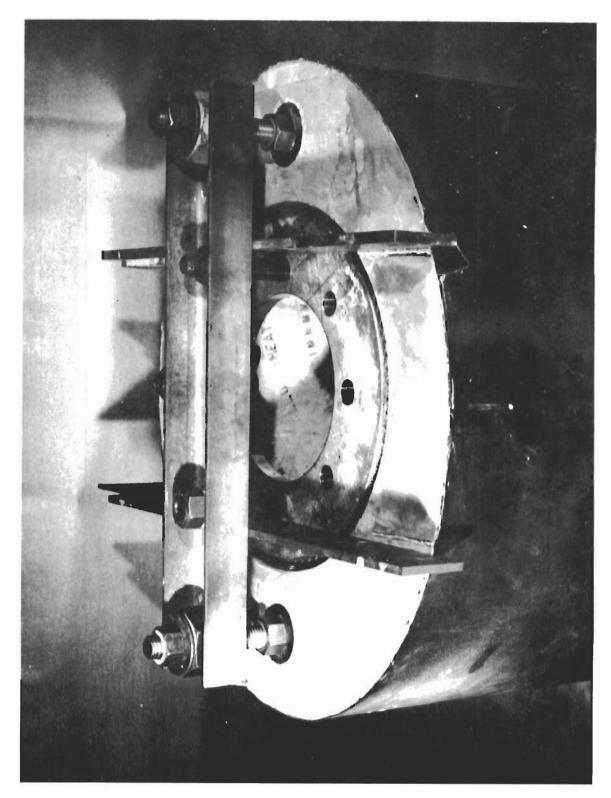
500 square inch Model Nose Cone in Mold--Ready for Refractory Casting
